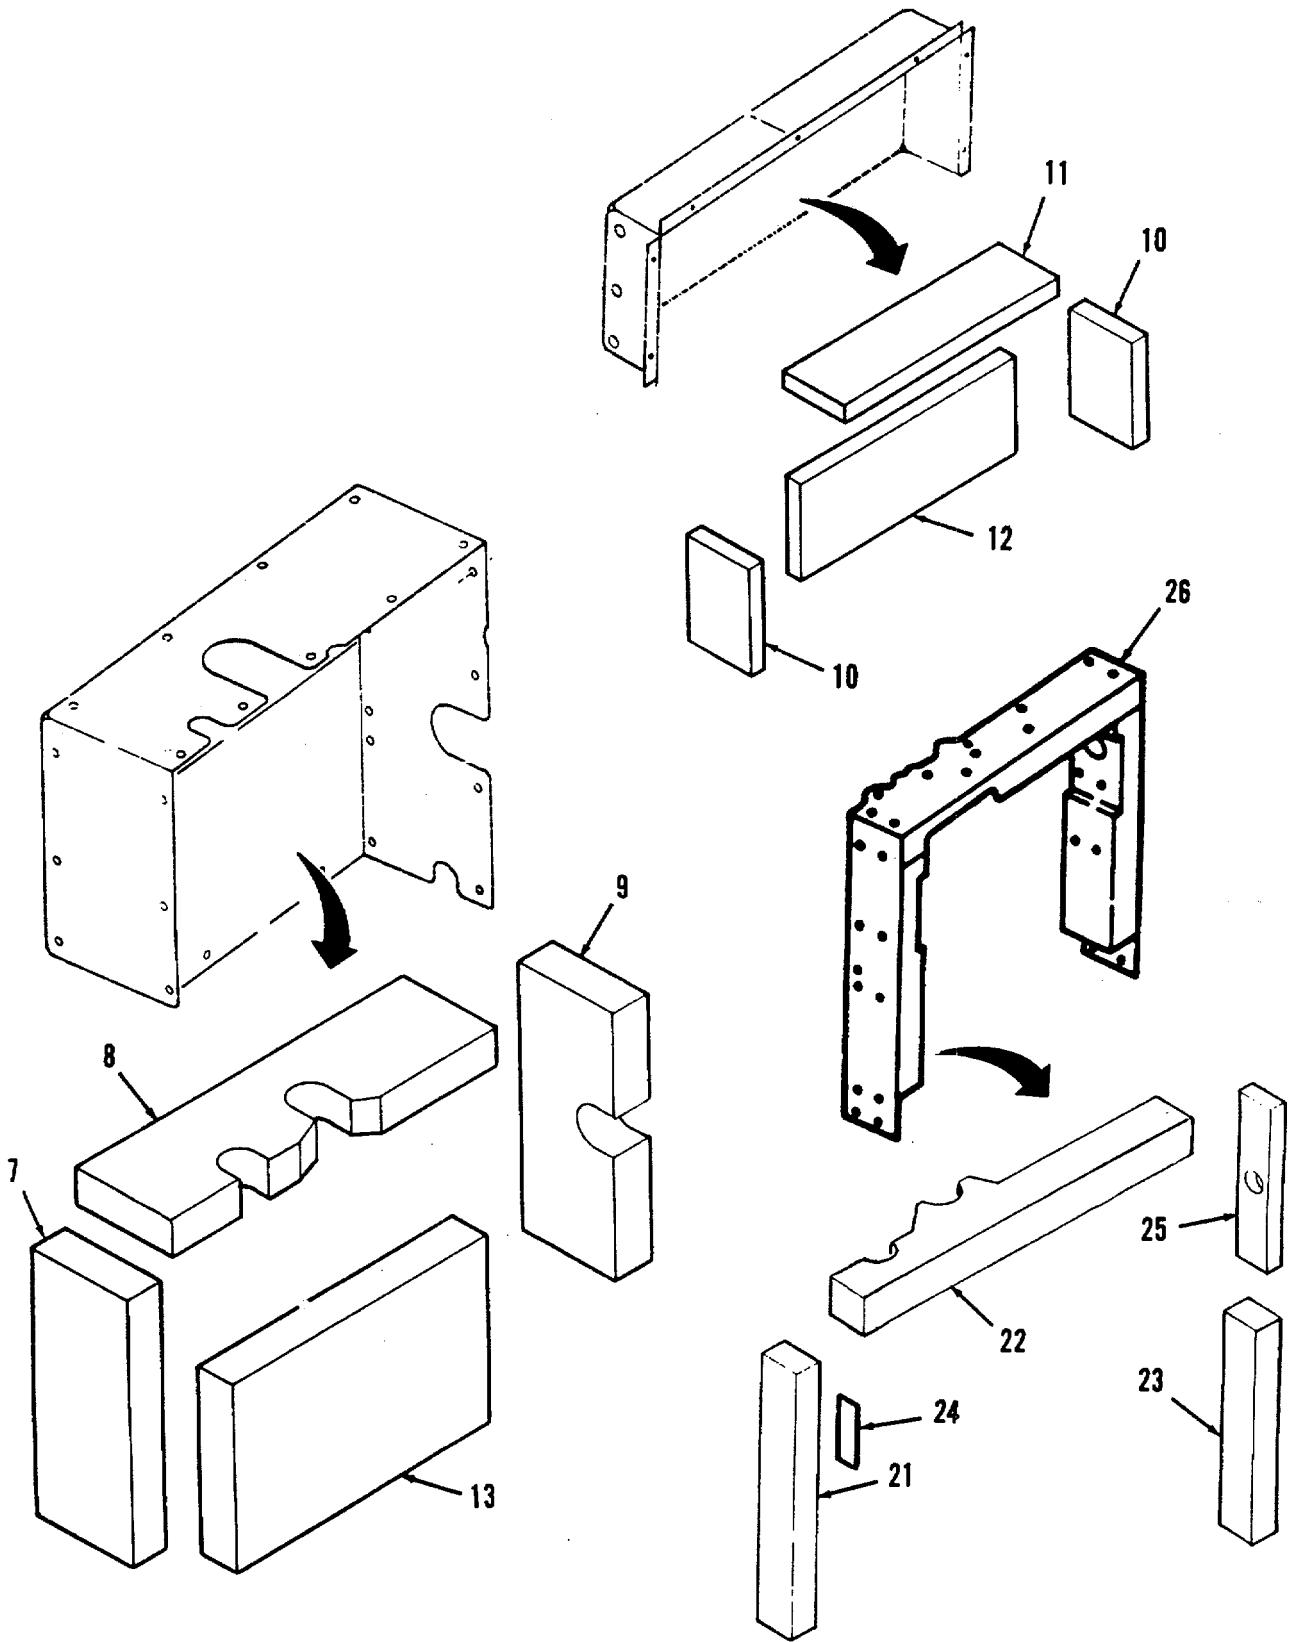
Enclosure Assembly Outlet Side (Sheet 2 of 2)
